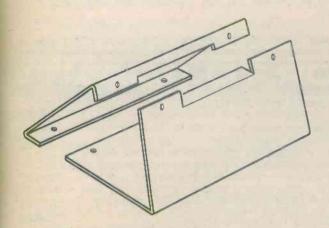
The front and back panels ready for assembly. These have been modified to provide an integral handle
